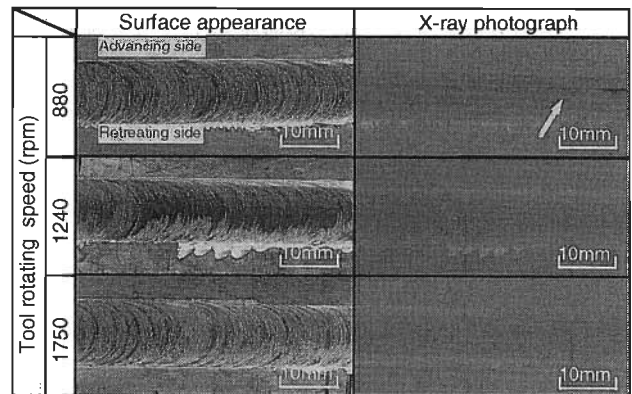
General appearances and X-ray photographs of AZ91D FS Welds at constant travel speed, 50 mm/min.
